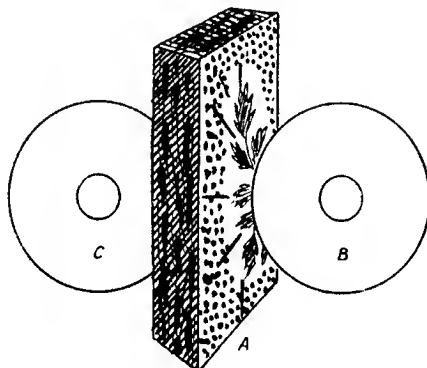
Raising Mill from a Flat Die—A, the die (hardened); B, the mill (soft); C, the back bowl
